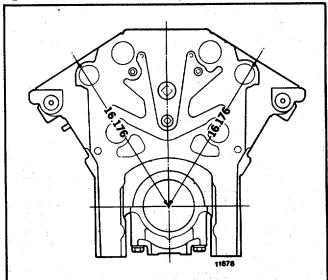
Minimum Distance from Centerline of Crankshaft to Top of Cylinder Block
